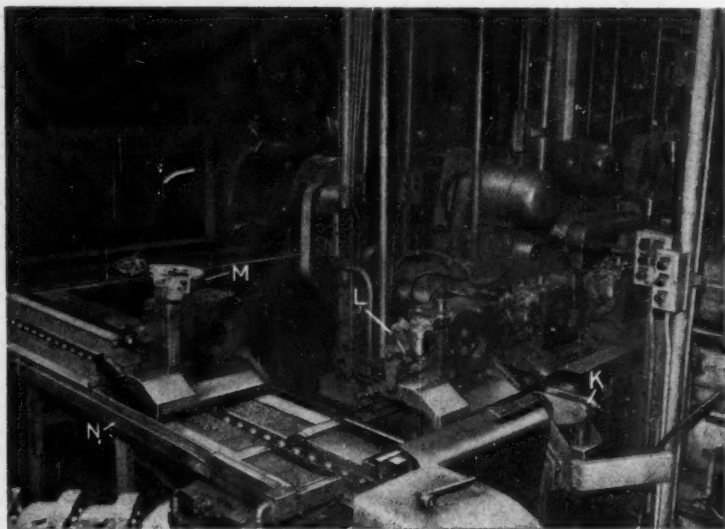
On arrival at the Unloading Station of the Cross Machine, the Casting From the Leading End of the Fixture is Removed, and the Casting from inside the Fixture is Placed on Top, as at *M*, so that it may be Removed for Certain Auxiliary Operations at an Intermediate Station
